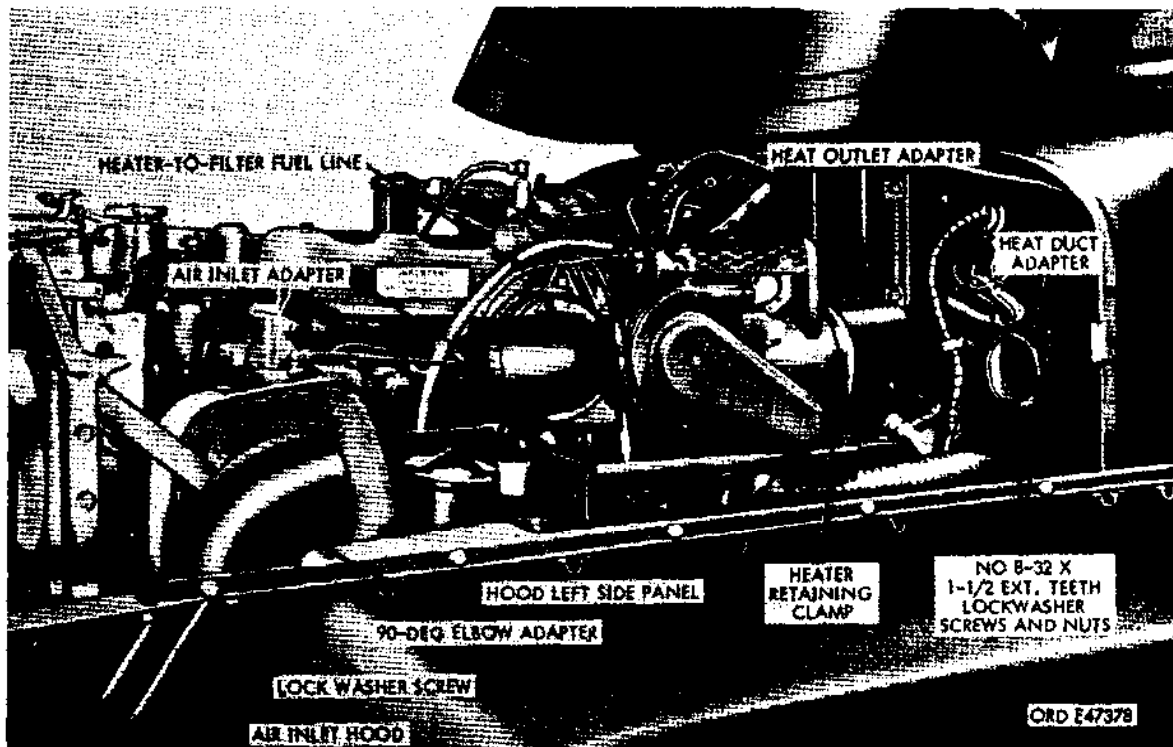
Air inlet hood, elbow adapter, personnel heater and air adapter installed
